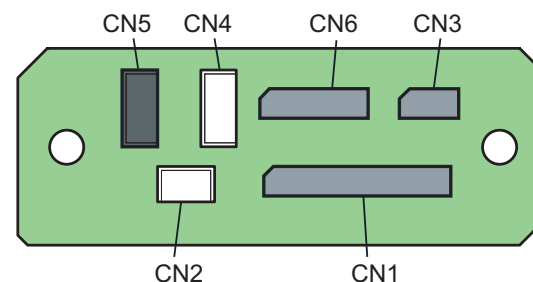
Connector Layout of the BOARD ASSY., SUB
